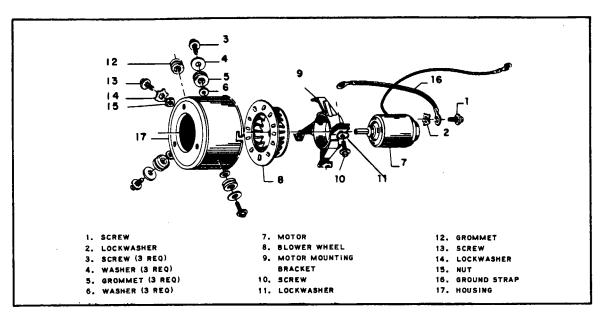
Exploded Parts View, Ventilating Air Blower Assembly
